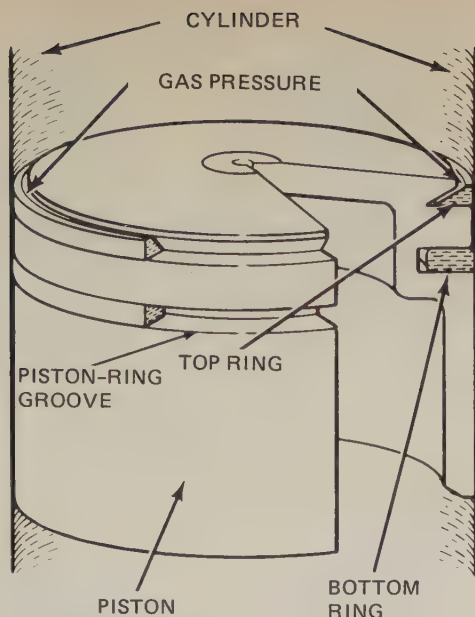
Typical piston with piston rings in place. When the piston is installed in the cylinder, the rings are compressed into the grooves in the piston. (*Lawn Boy Division of Outboard Marine Corporation*)
